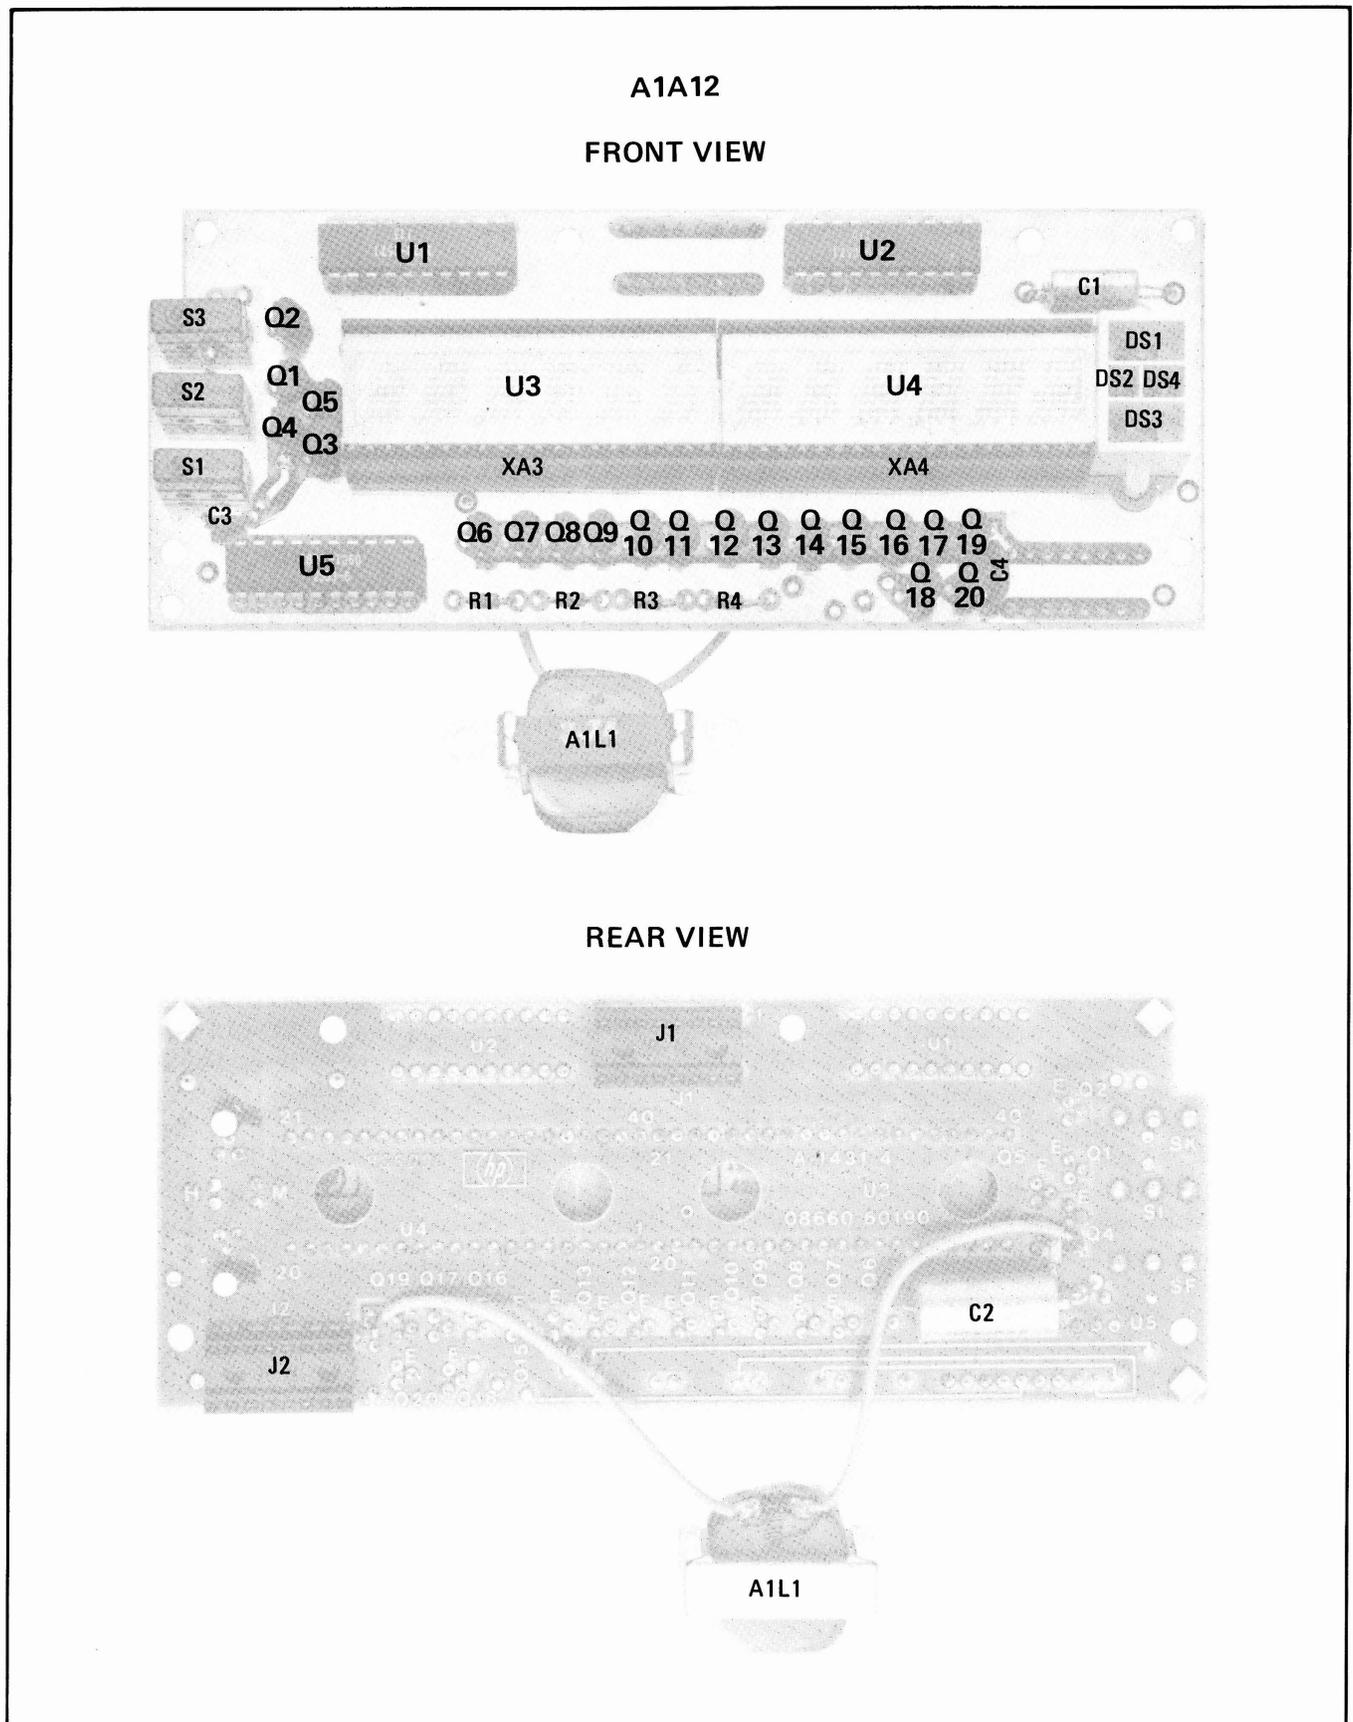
A1A12 Numeric Readout Assembly Component Locations
